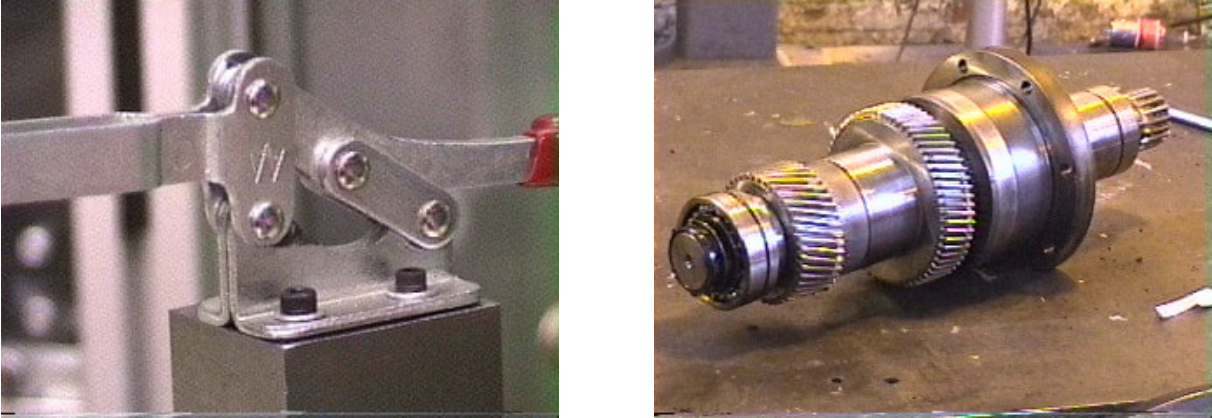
Clamp Mechanism and Gear Assembly Encountered In CAT Video Tour
